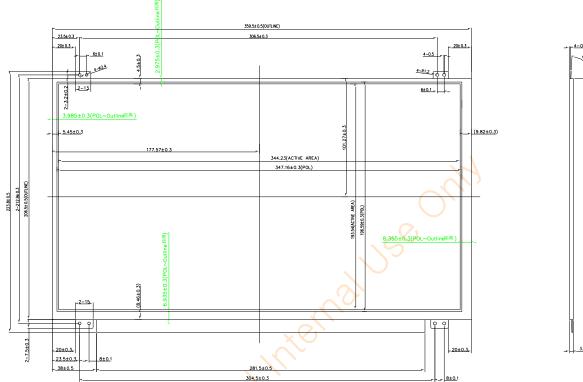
TFT-LCD Module Outline Dimension (Front View)
